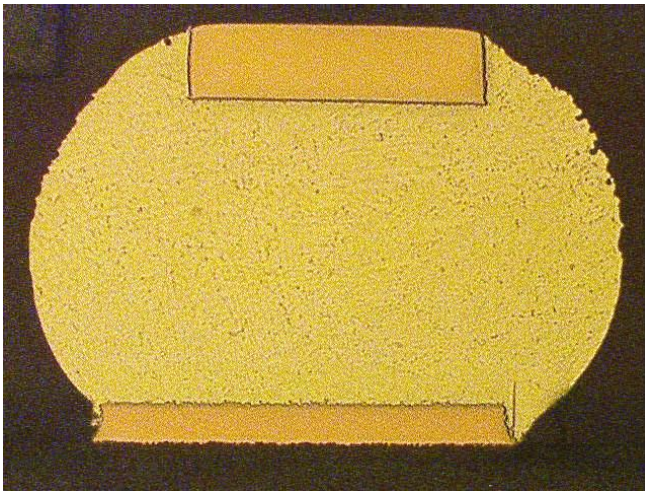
Mezalok Stacking Connector, Typical Solder Joints, Pbfree Alloy
